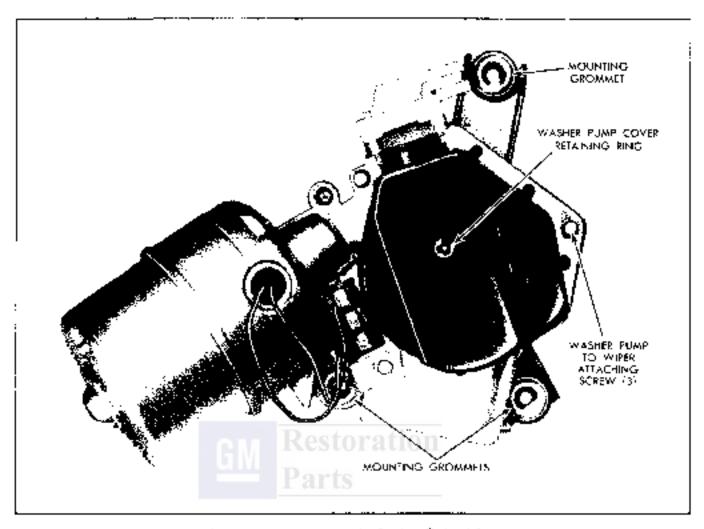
Wiper Motor Assembly—Portice—Ontional Tempest
